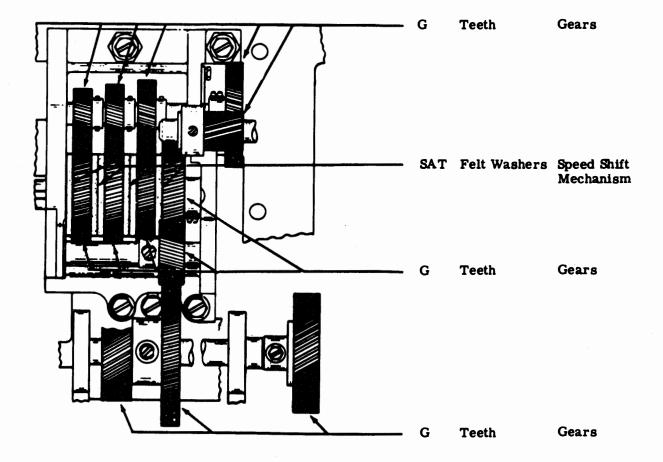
Gearshift Mechanism for Tape Printer Keyboard (Sheet 2 of 2)
